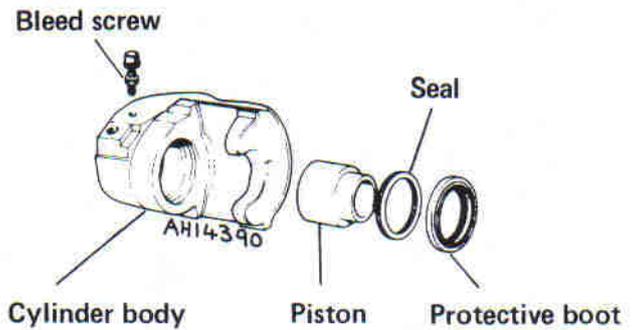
Exploded view of caliper, piston and seals (Sec 6)
